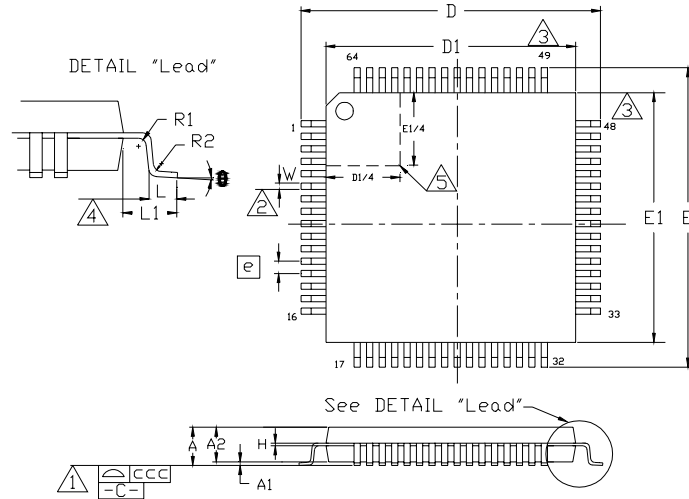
64 Pin TQFP Package Outline (10x10x1.4 mm body - 2 mm footprint)
